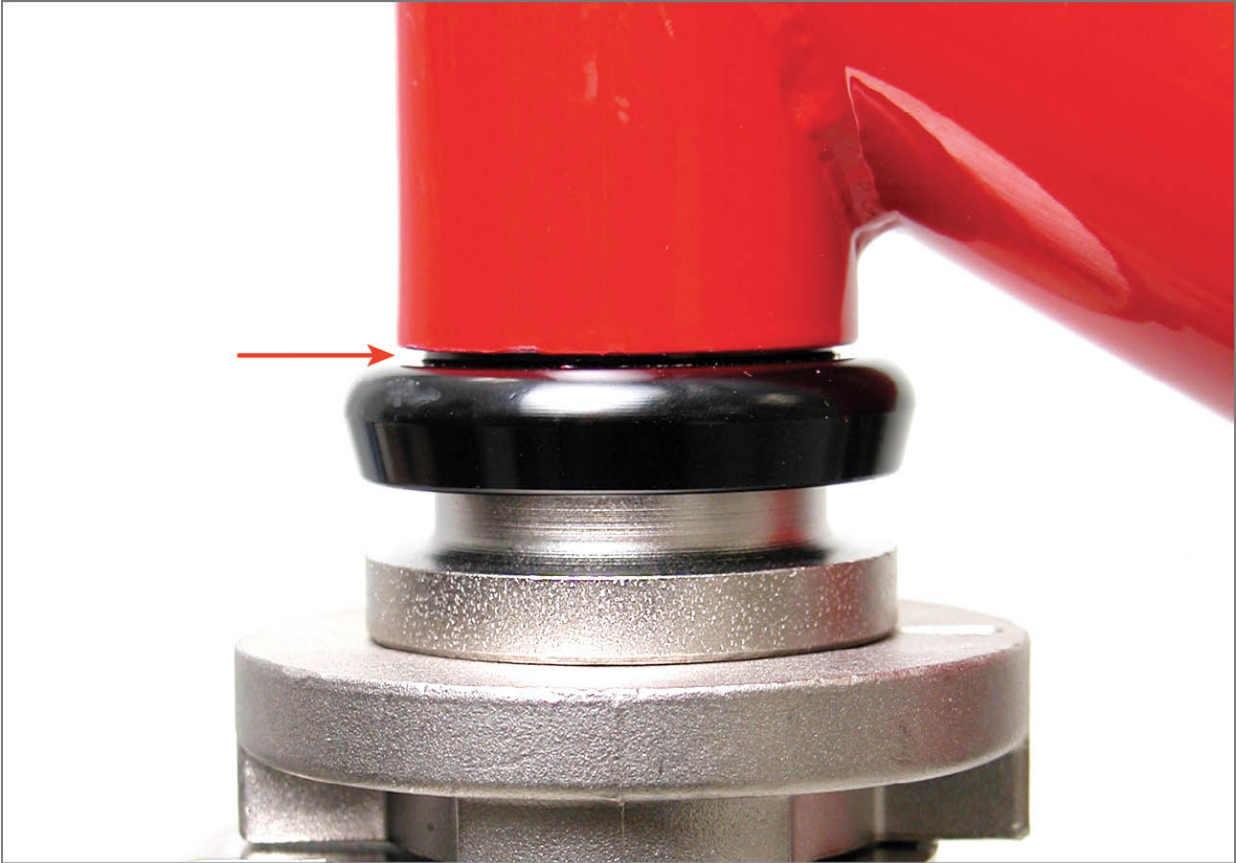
This cup showing signs of not being fully seated into head tube
